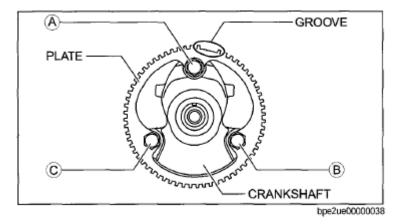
Identifying Crankshaft, Plate, Groove And Mounting Bolts
